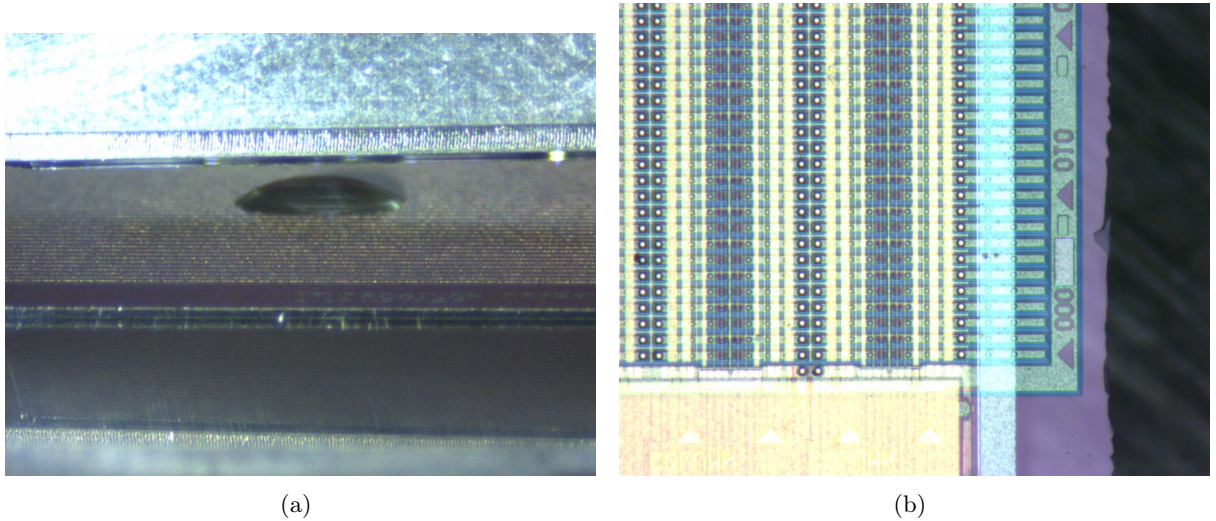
Placement of a sensor on top of a front-end chip using a Fineplacer Pico machine.
